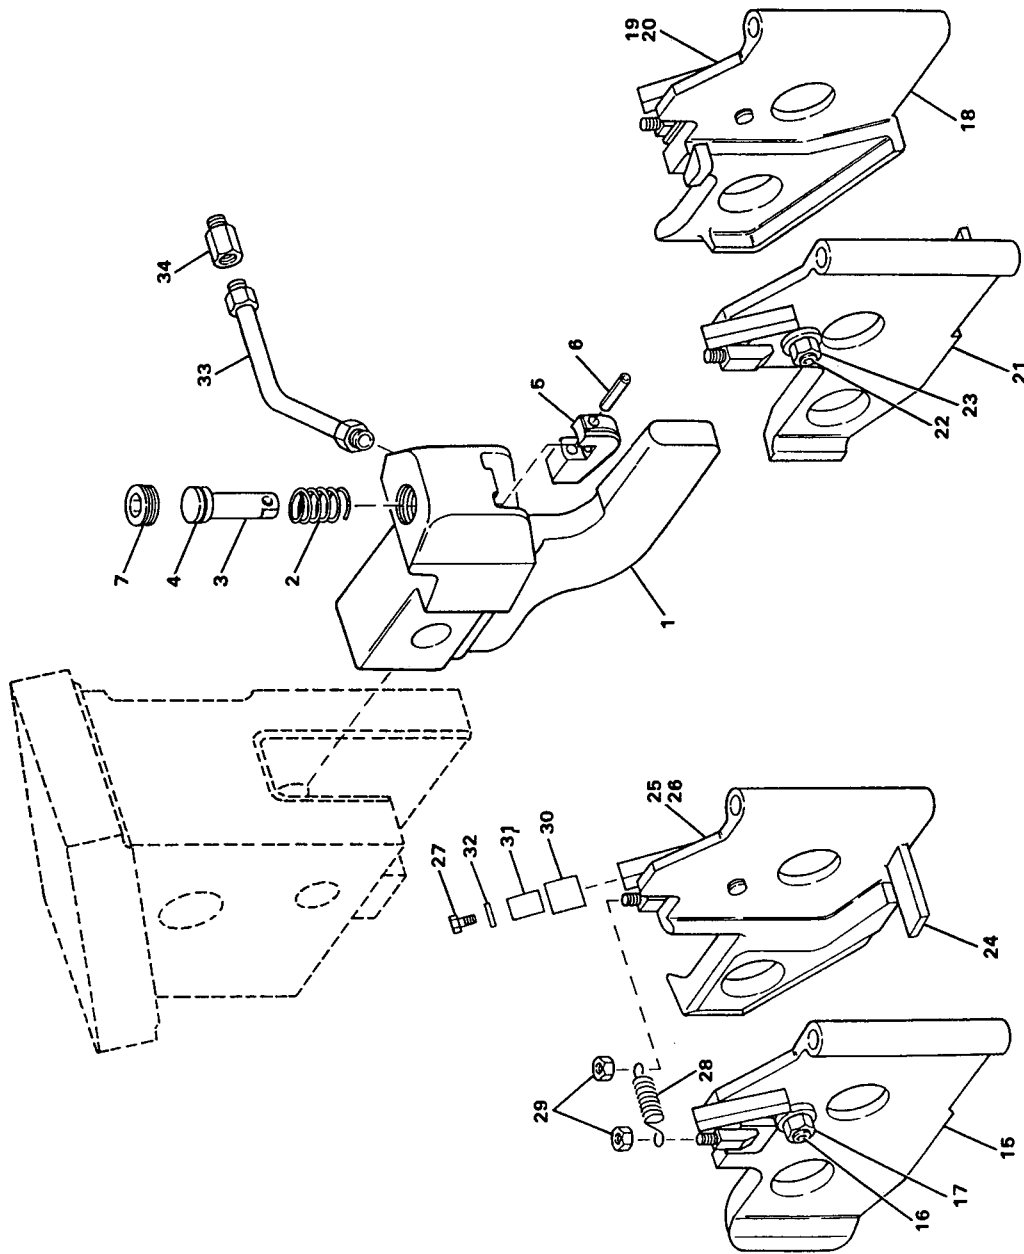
ANCHOR TOOL CHANNELOC S/N 680232 and Above
